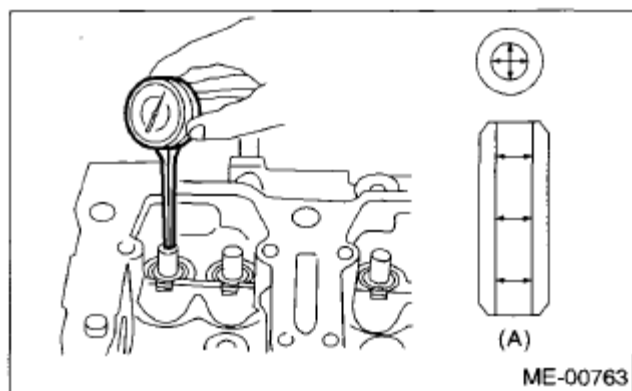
Measuring Clearance Between Valve Guide And Valve Stem
